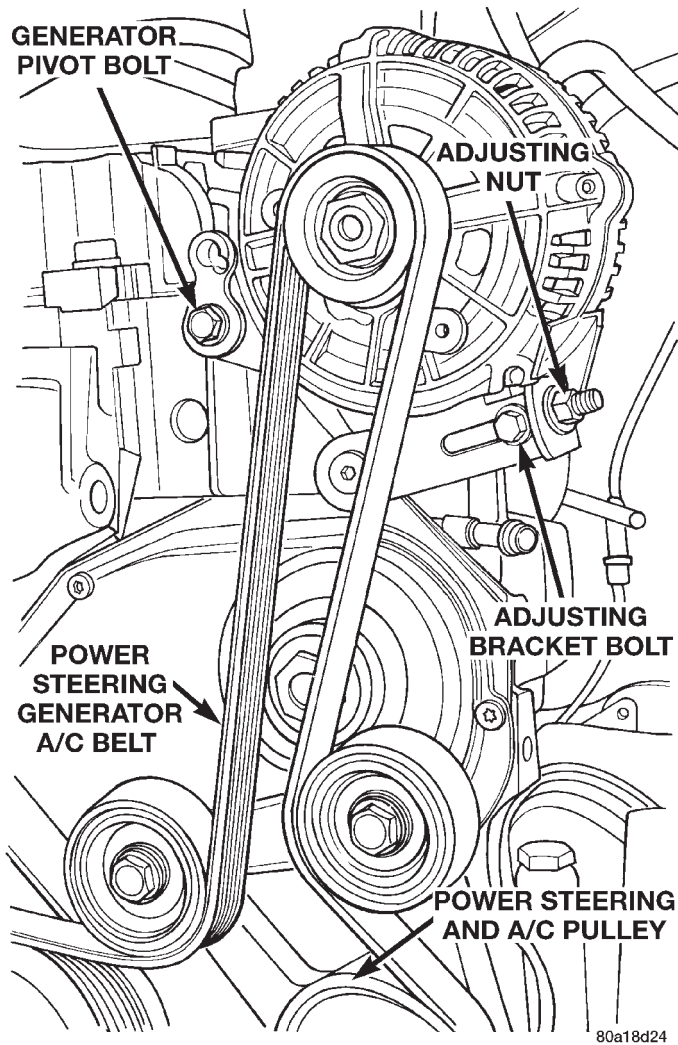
Generator/Power Steering Removal – 2.5L VM Diesel
